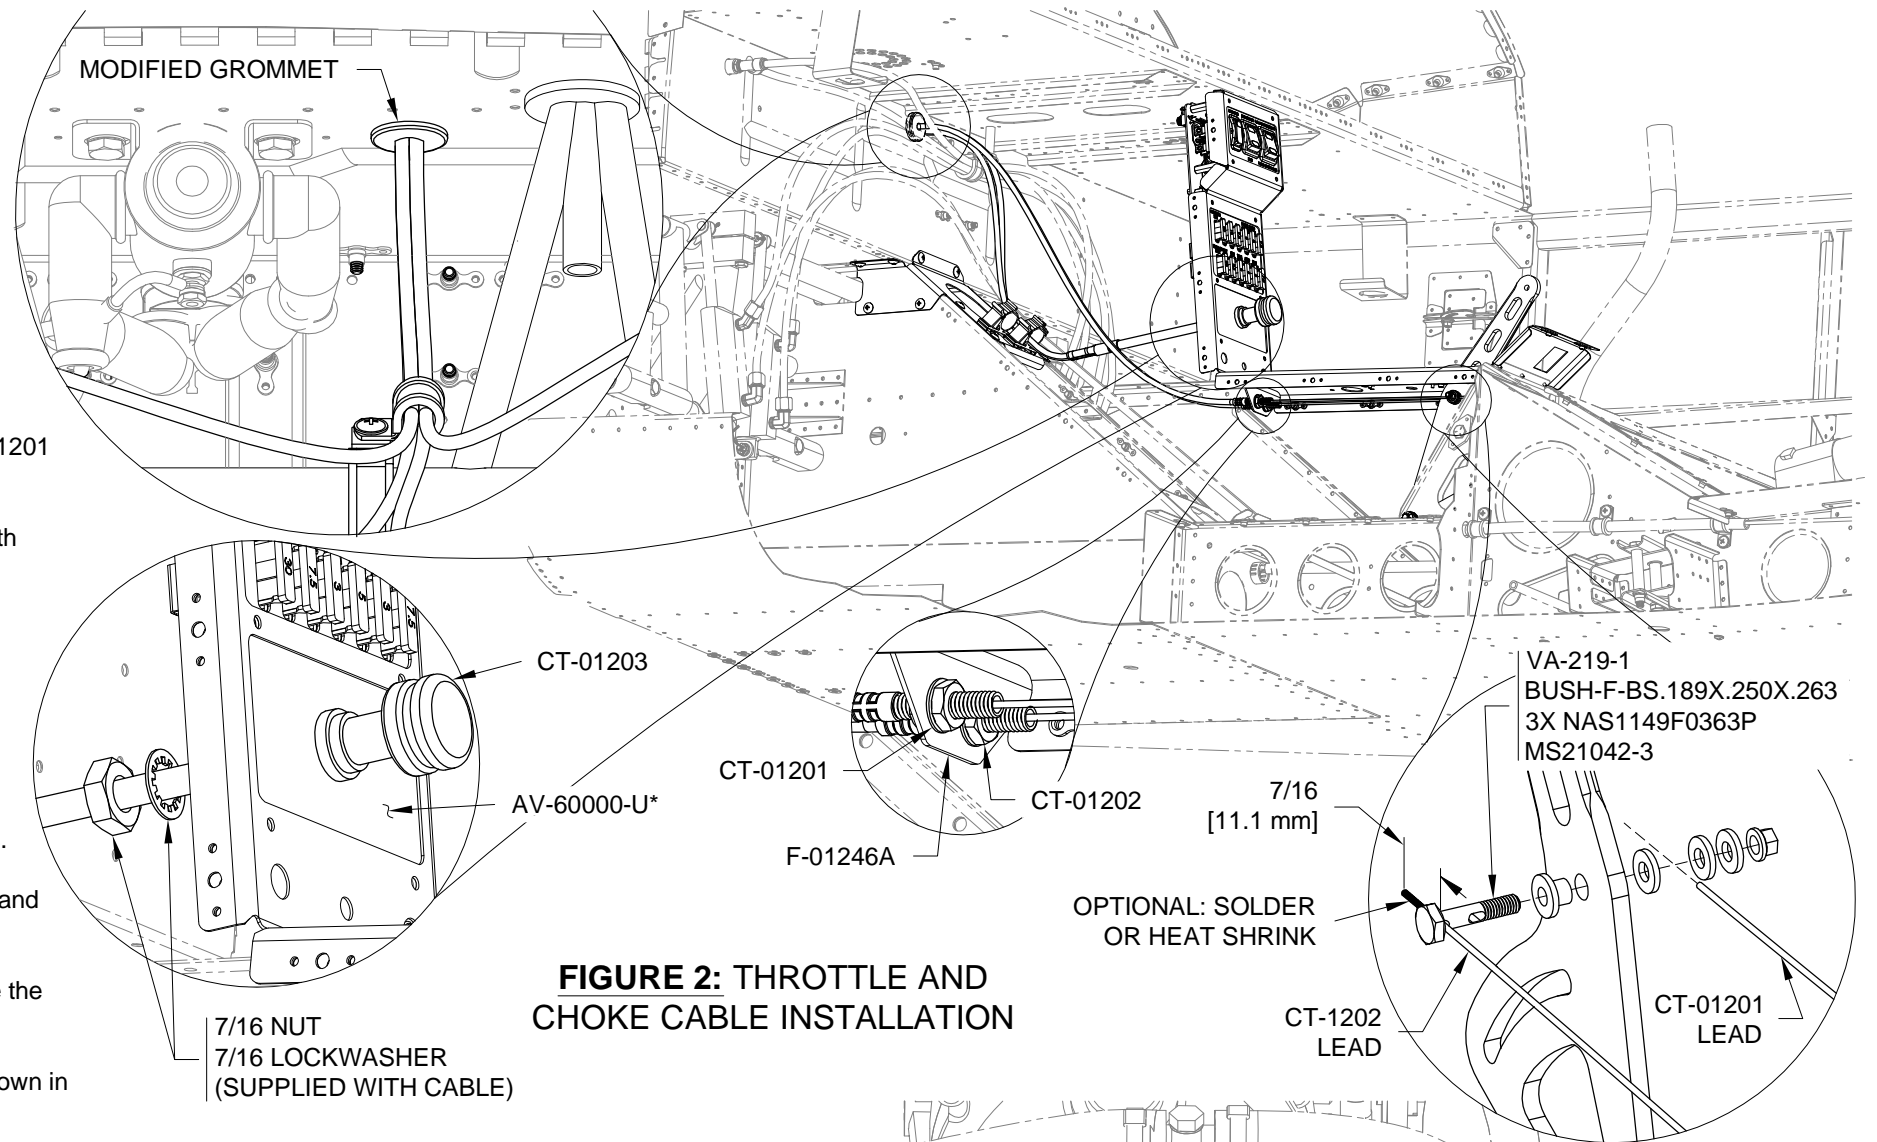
THROTTLE AND CHOKE CABLE INSTALLATION
